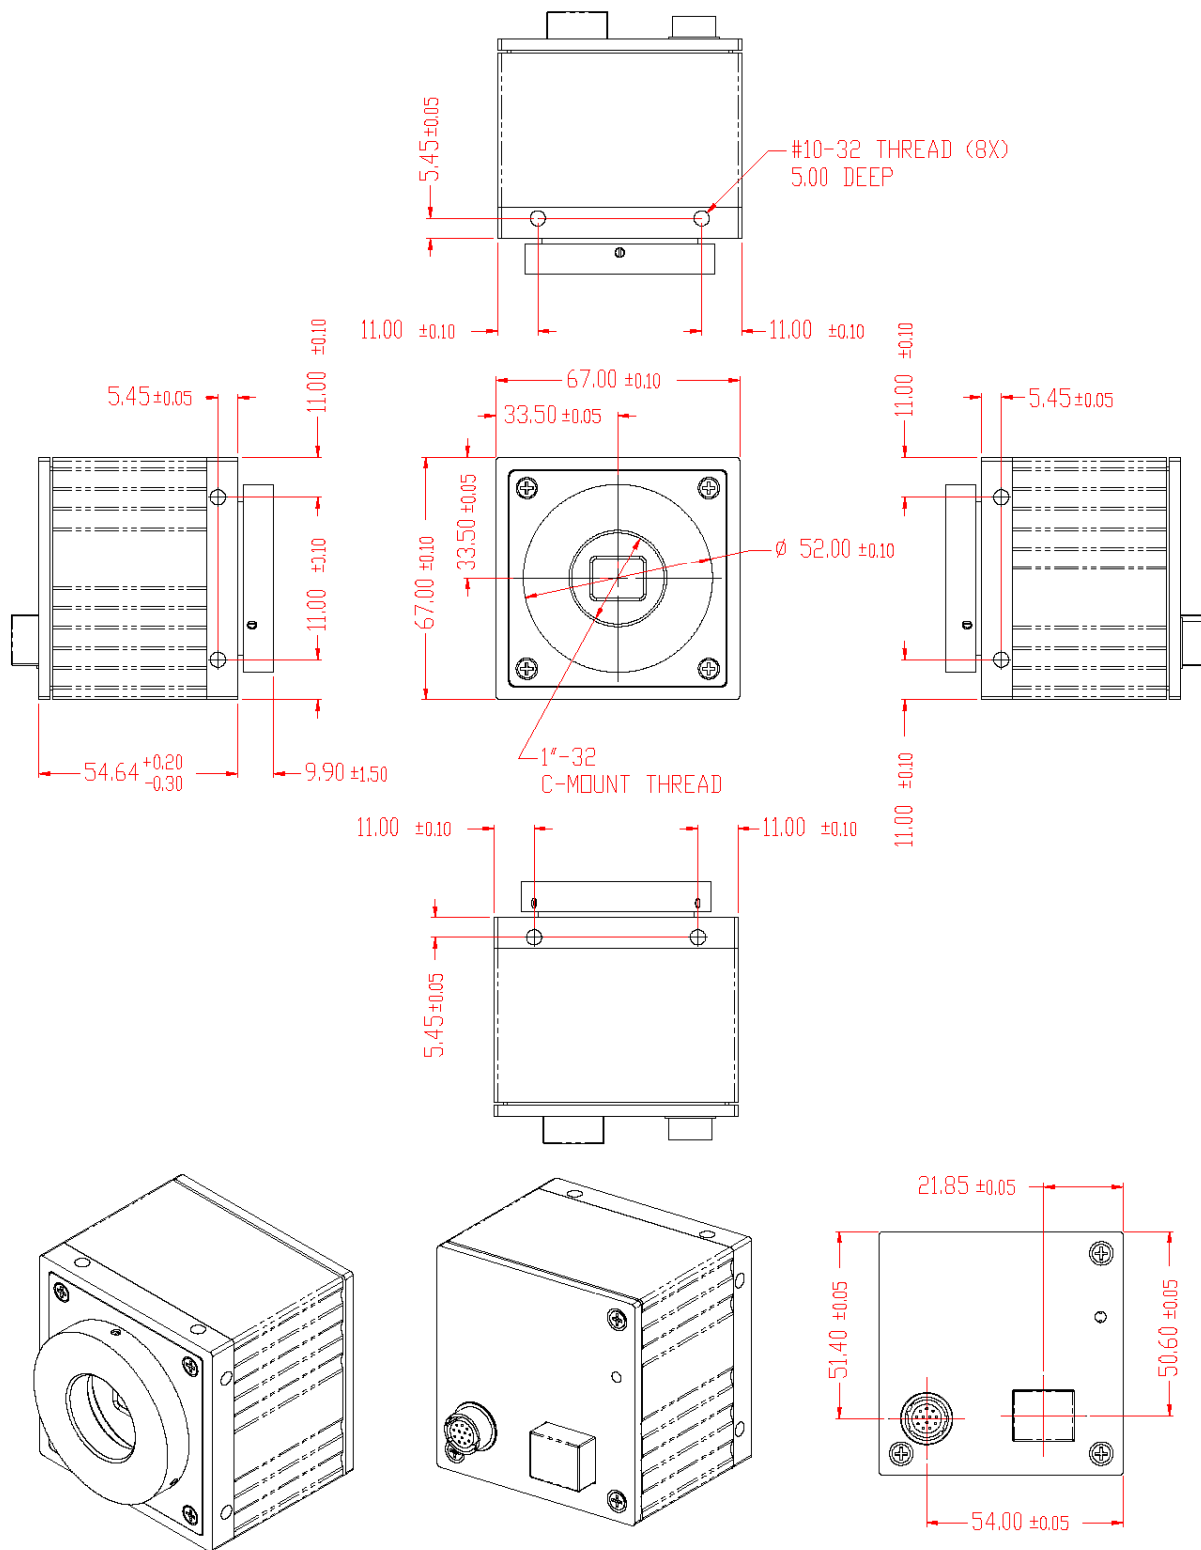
IPX-VGA210-G Dimensional Drawings
